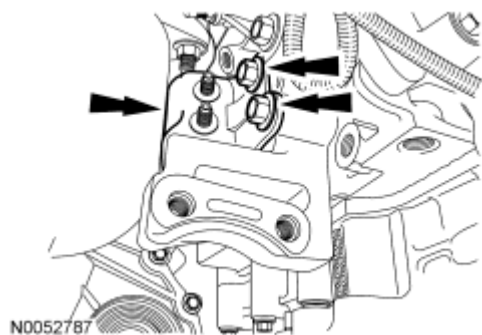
Locating RH Exhaust Heat Shield Bolts
